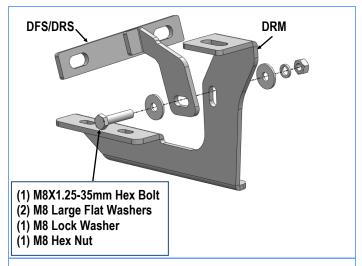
Driver Side Front Mounting Location (Vehicles with factory threaded hole in floor panel)
